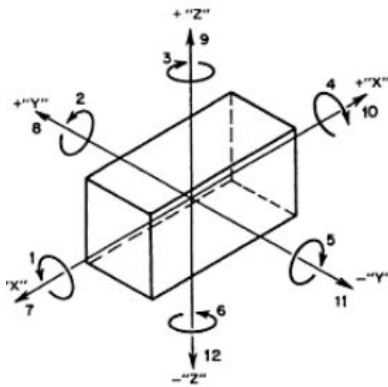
The twelve degrees of freedom of a workpiece [73]
